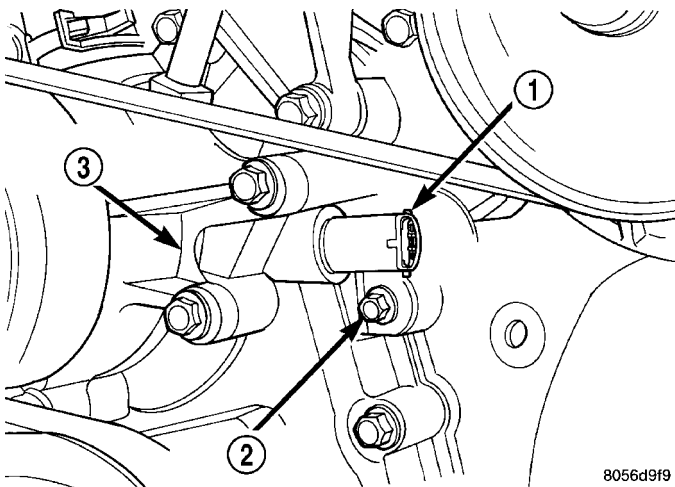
DISTRIBUTOR AND CMP LOCATION - 5.9L
